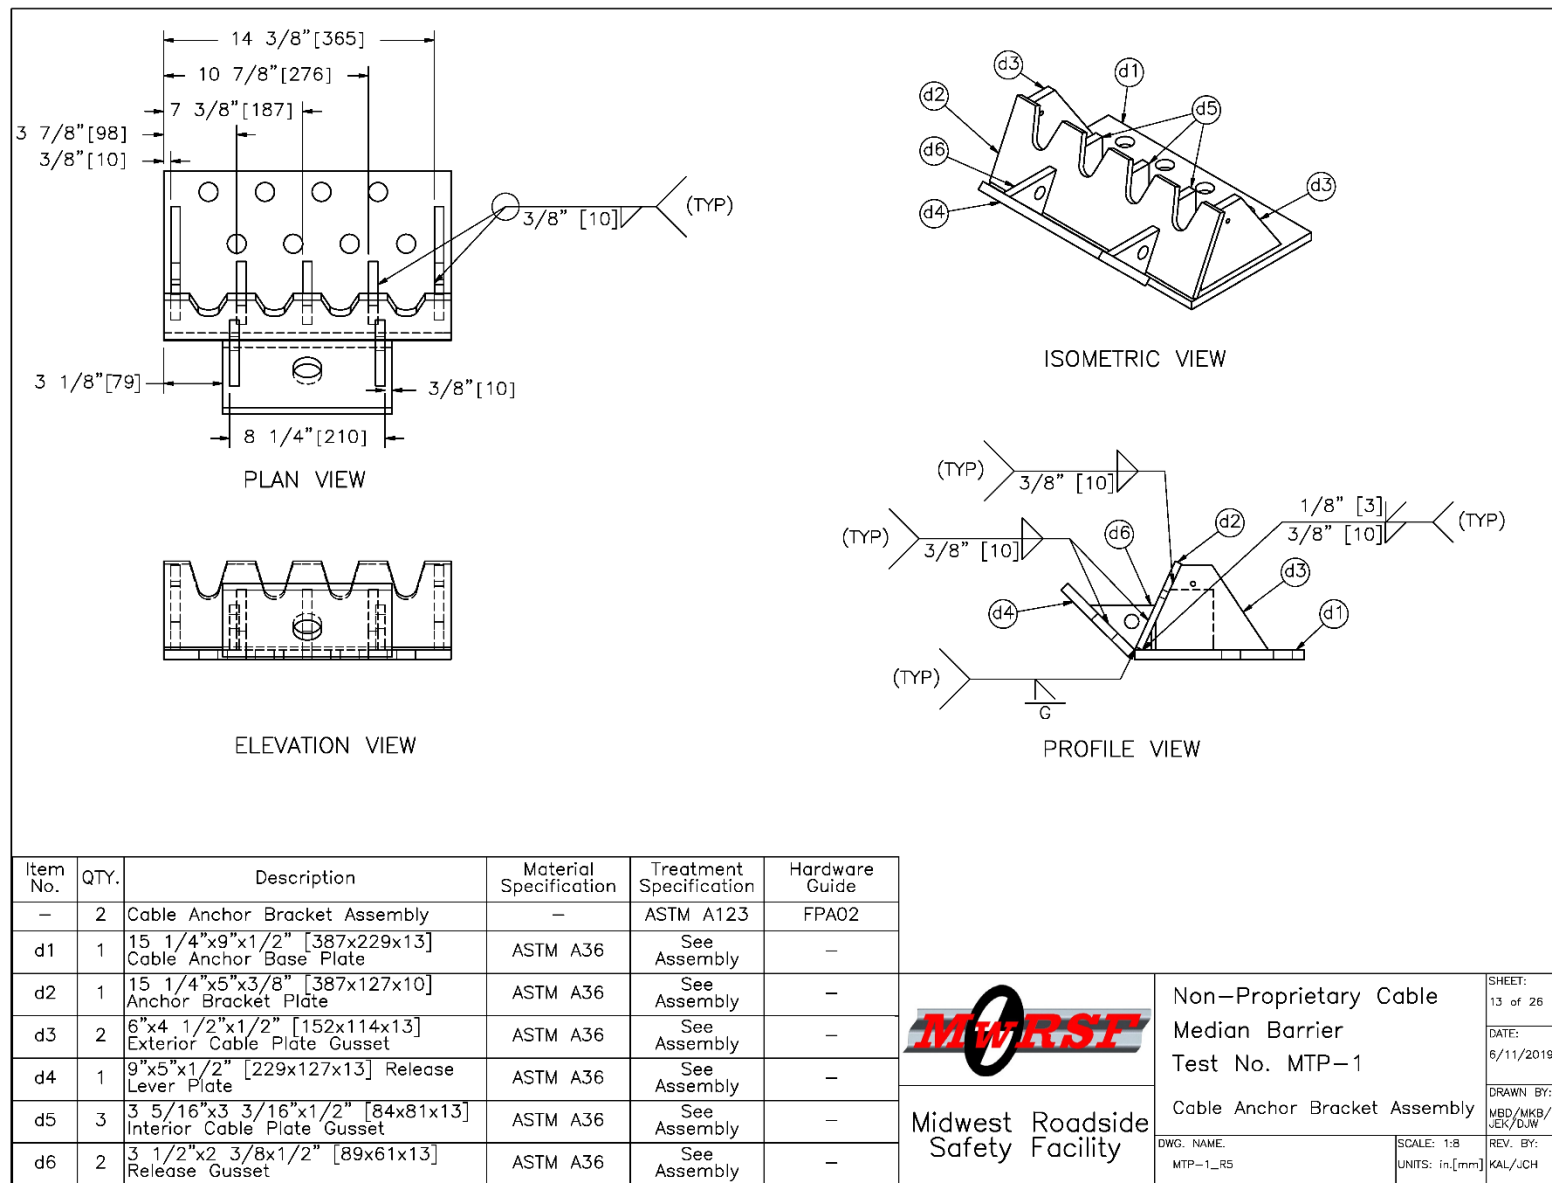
Cable Anchor Bracket Assembly, Test No. MTP-1
